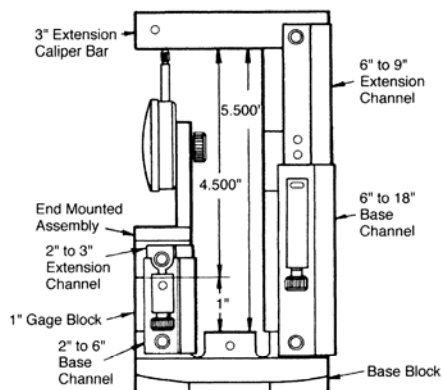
The precalibrated indicator technique can also be used for inside measurement, as shown in this example. It is being zeroed in the illustration. Following that, gage blocks will be inserted in one or both stacks to create the desired dimension. The extra step, of course, somewhat reduces the reliability.
